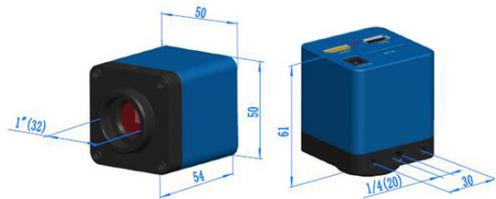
00 Product dimensions (mm) of the MikroCam MINI Full HD HDMI
